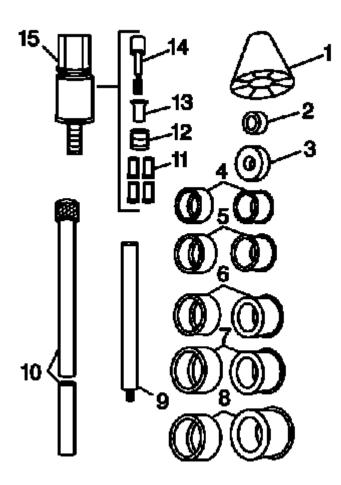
View Of J 33049 Camshaft Bearing Service Kit Components Courtesy of GENERAL MOTORS CORP.
